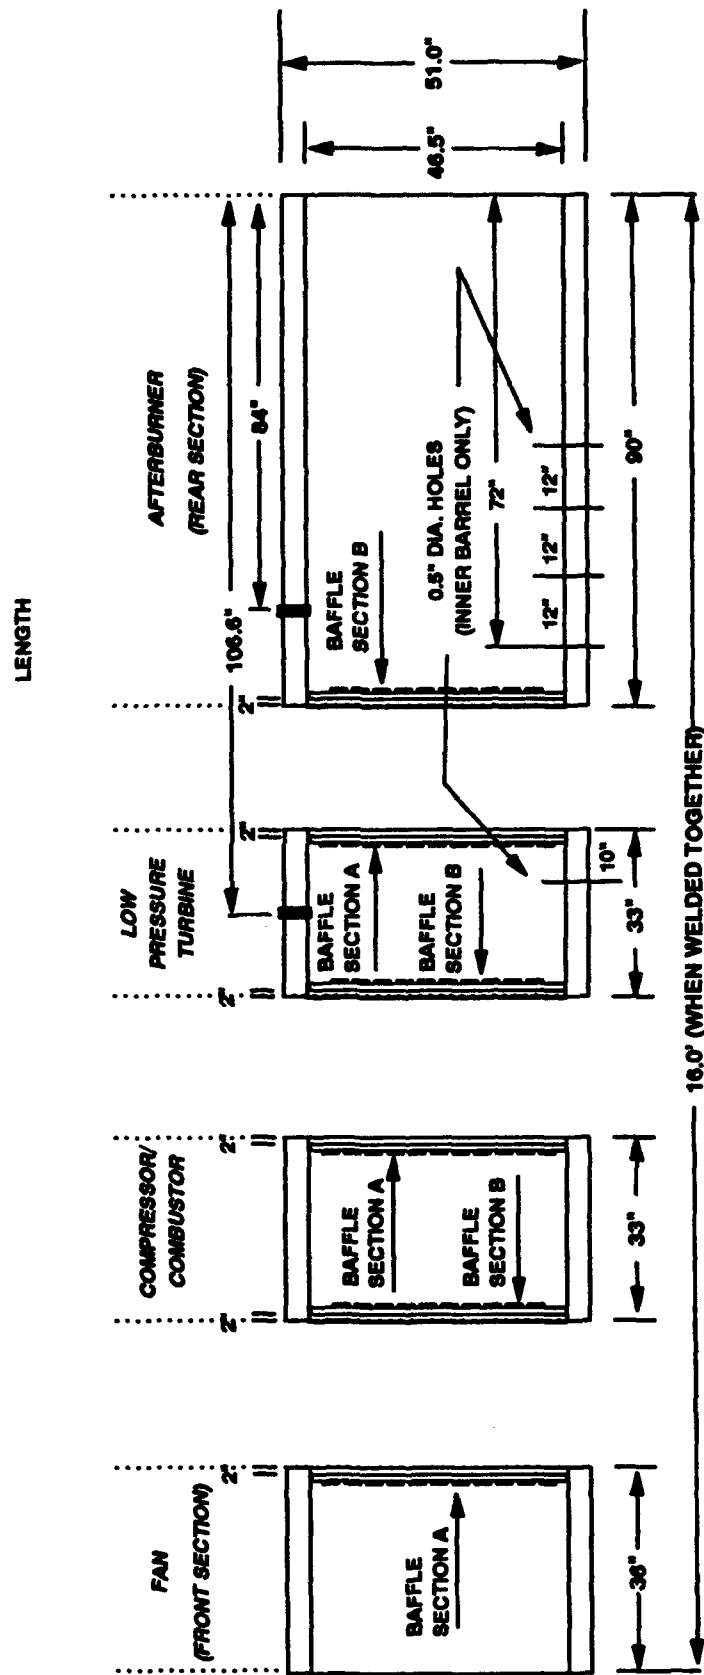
F-100 Engine-Nacelle Test Apparatus; Fabrication Drawing, Page 2.
